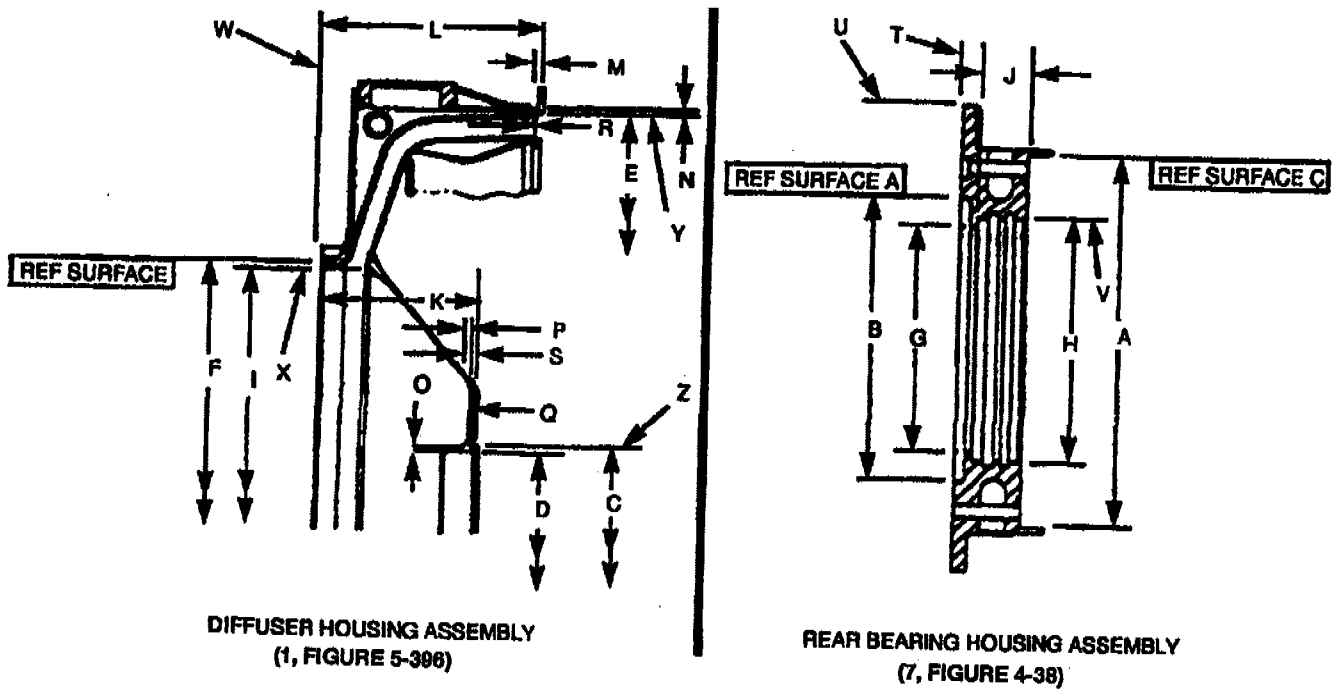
Diffuser Housing Assembly, and Rear Bearing Housing Dimensional Inspection Locations.
